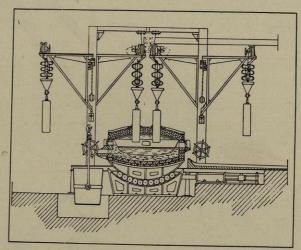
Keller's 8,000-kg. Furnace at Unieux (section).
